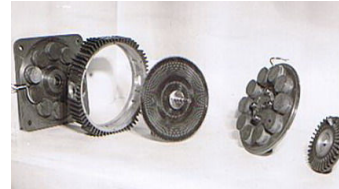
Component elements of a thruster with axial air gap and disk rotor.
